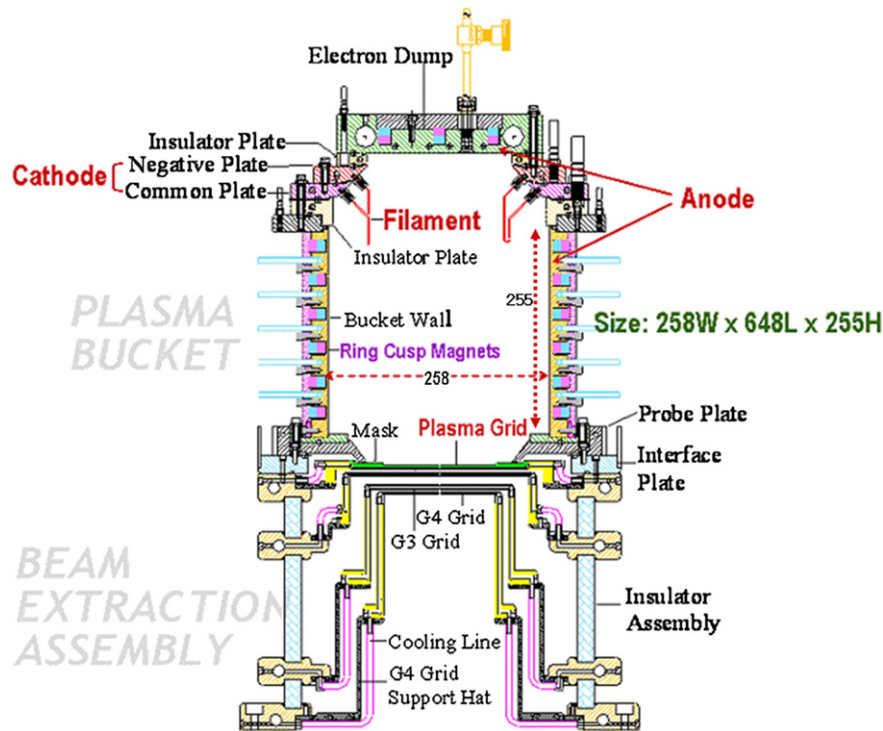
Assembly drawing of the KSTAR NB prototype ion source.
